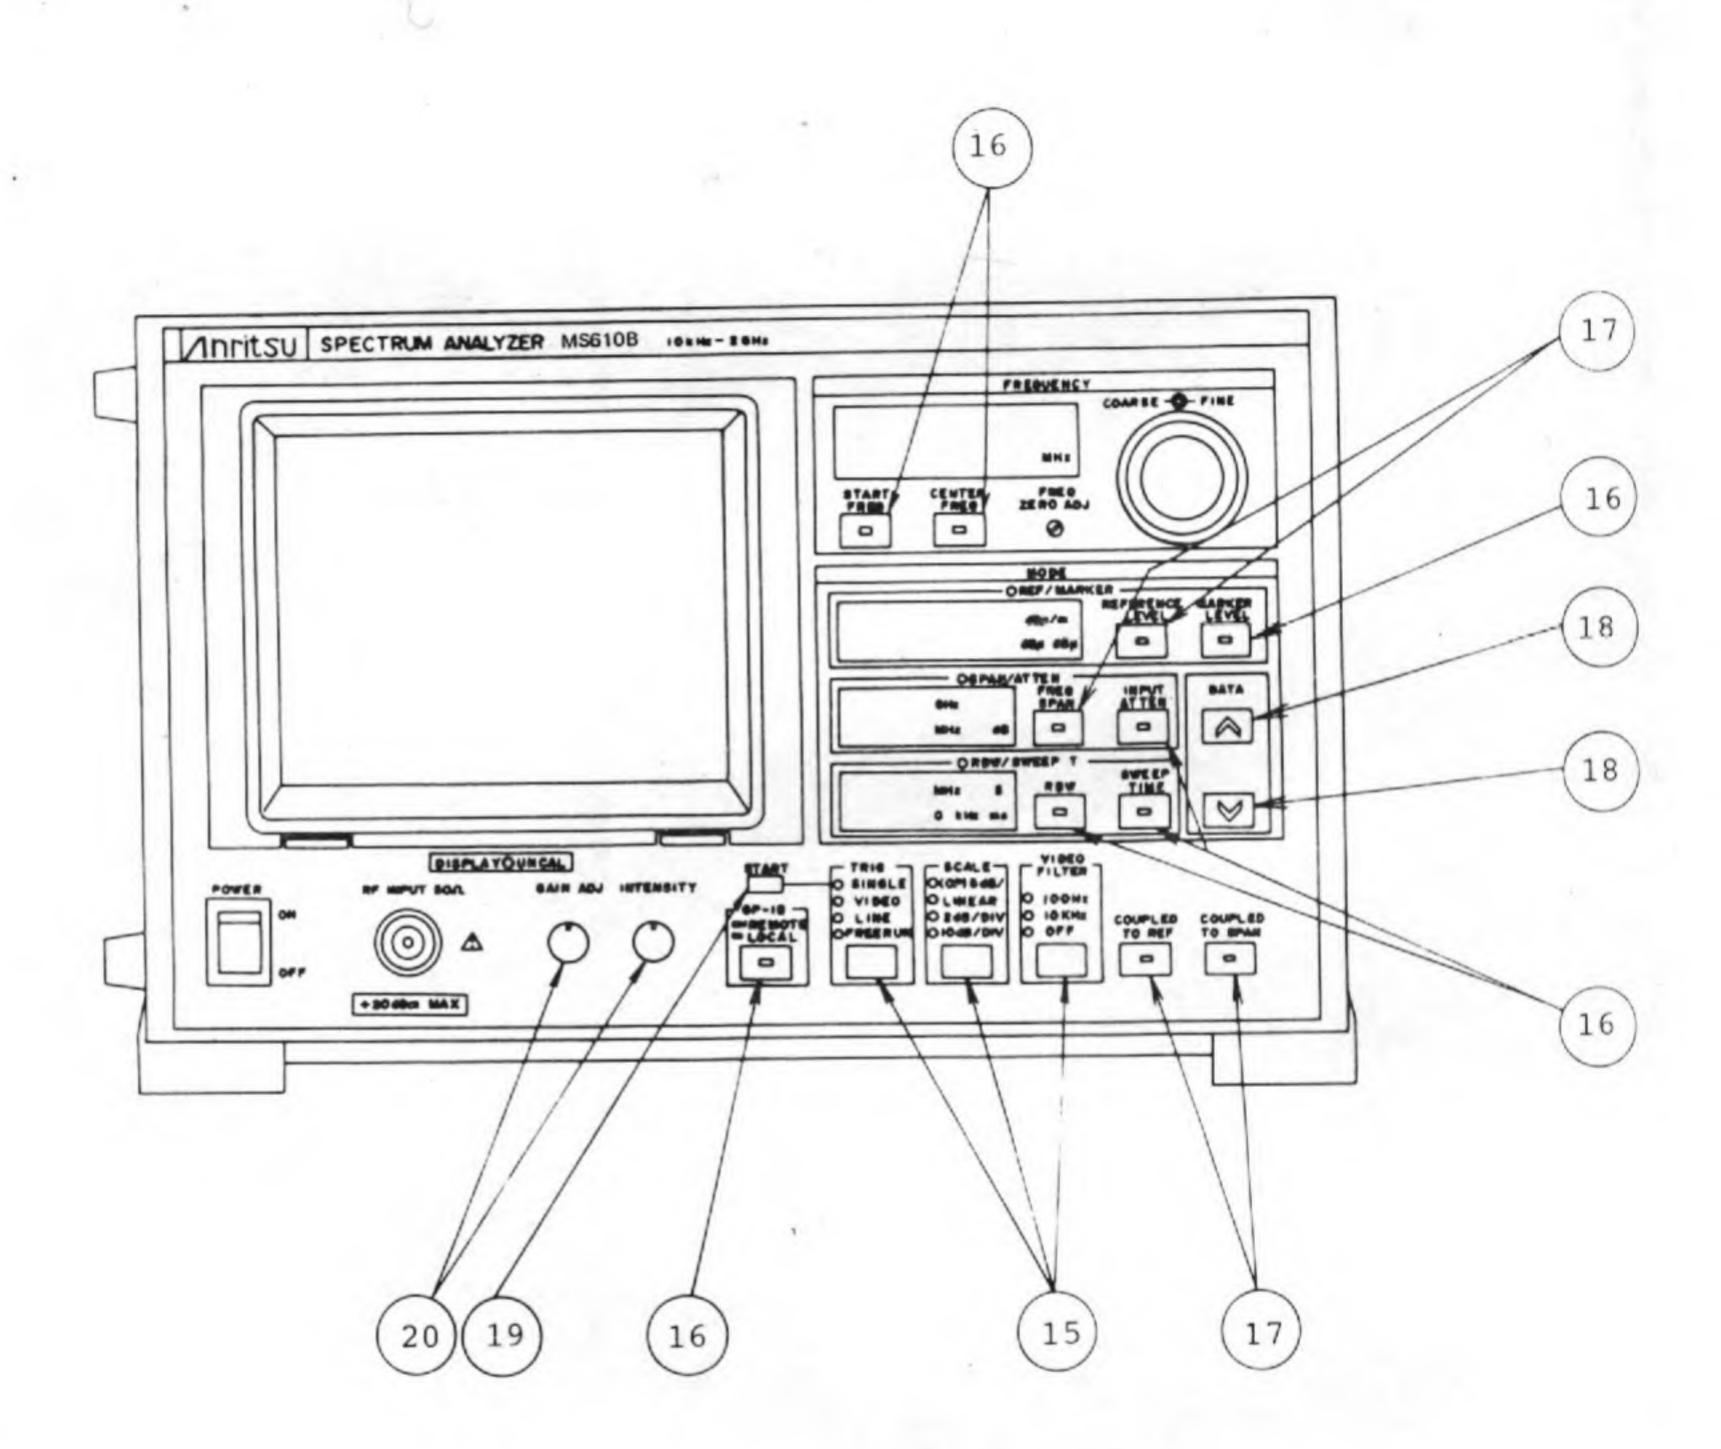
Cabinet Assembly 2-5/2-6 (blank)
